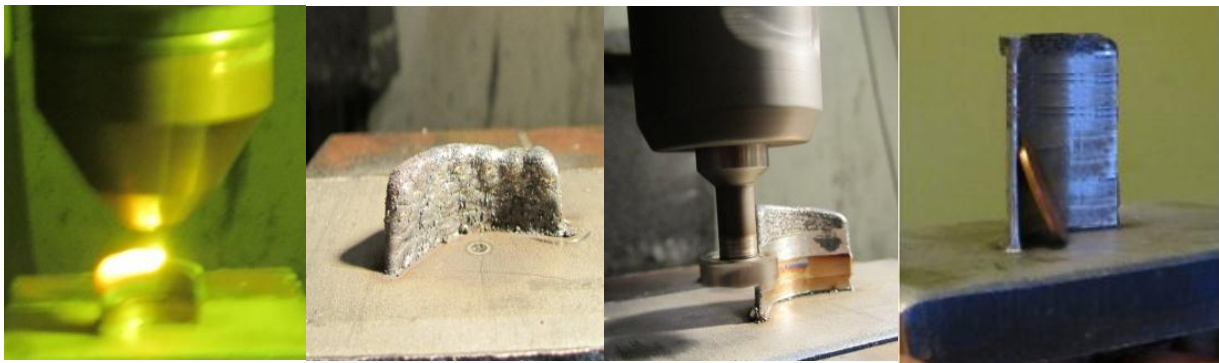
undercut milling machining to reduce spreading of molten pool at the following deposition process
